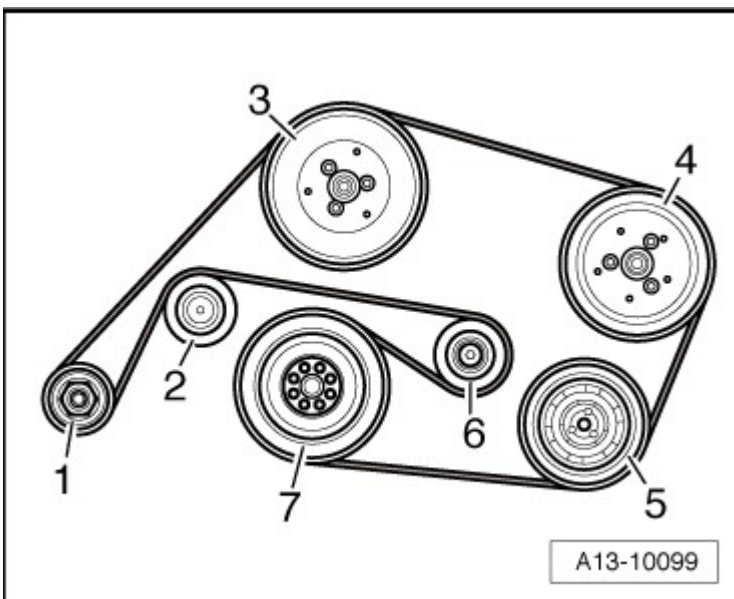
Placing Ribbed Belt Over Belt Pulley
